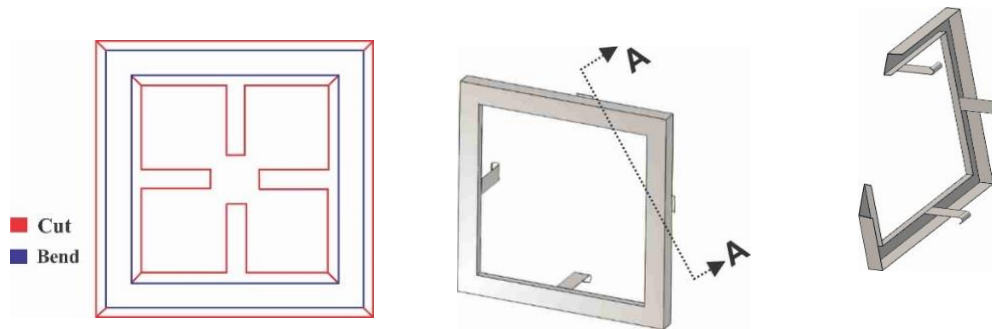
The layout of the cut and bend of the sheet metal plate.
